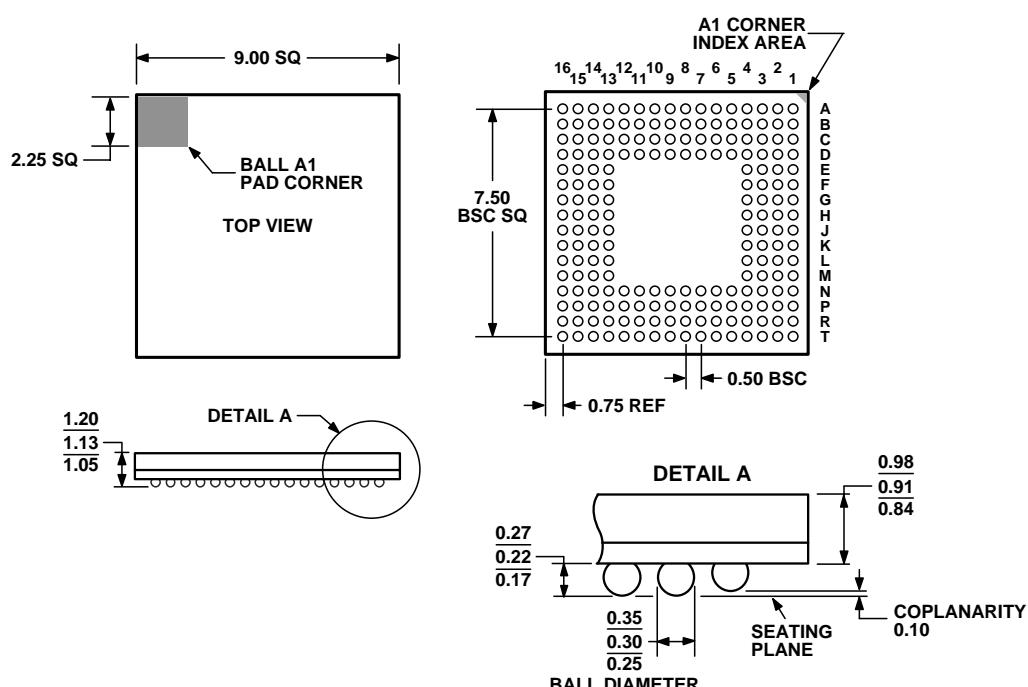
192-Ball Chip Scale Package Ball Grid Array [CSP_BGA]
